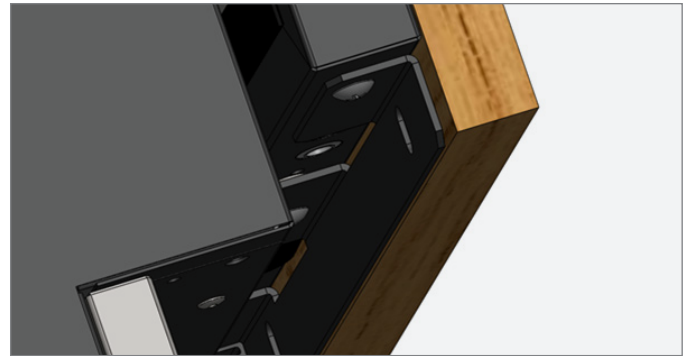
The bottom edge of the panel should align with the bracket as shown.
